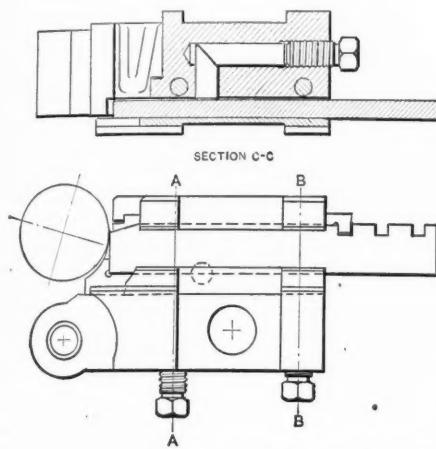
Holder for No-clearance Tool in the Flat Turret Lathe.
